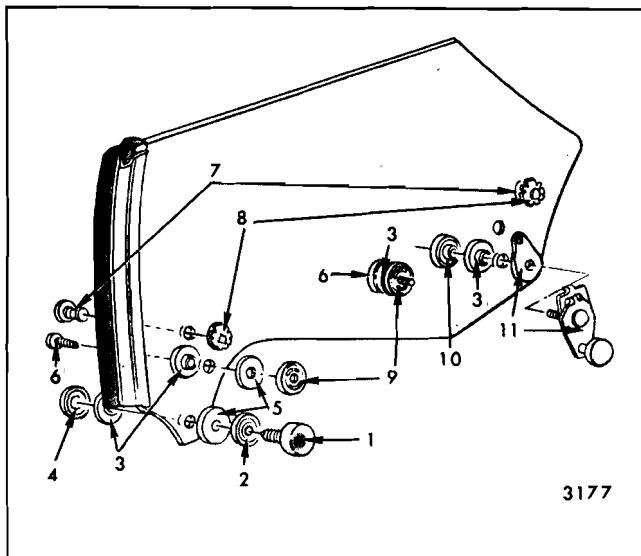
Rear Door Window Assembly - "B-39" and "C-39, 49 and 69" Styles
